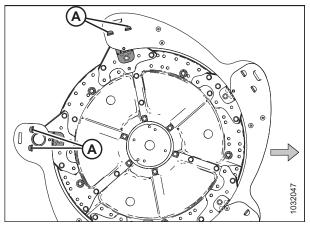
Reel Endshield Removed – Inboard Cam End
